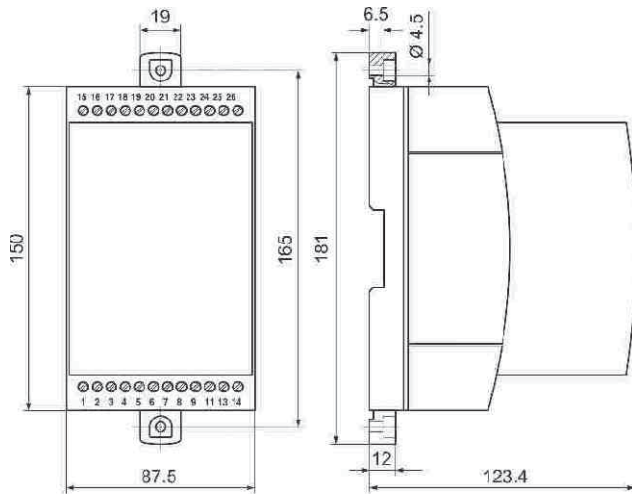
M40 in housing T24 screw hole mounting brackets pulled out.
